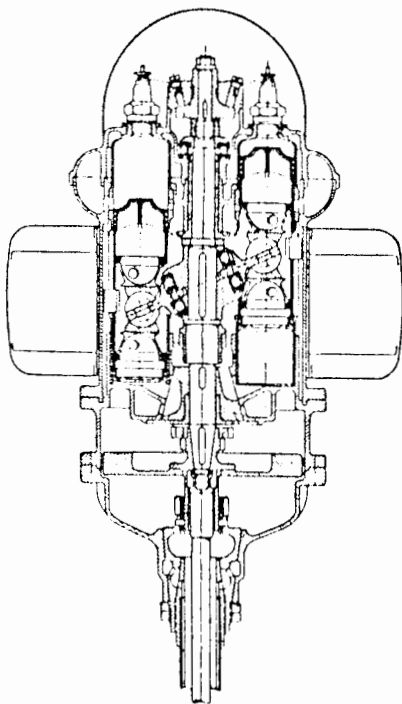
"Wobble"-Plate Type of Crankless Mechanism
